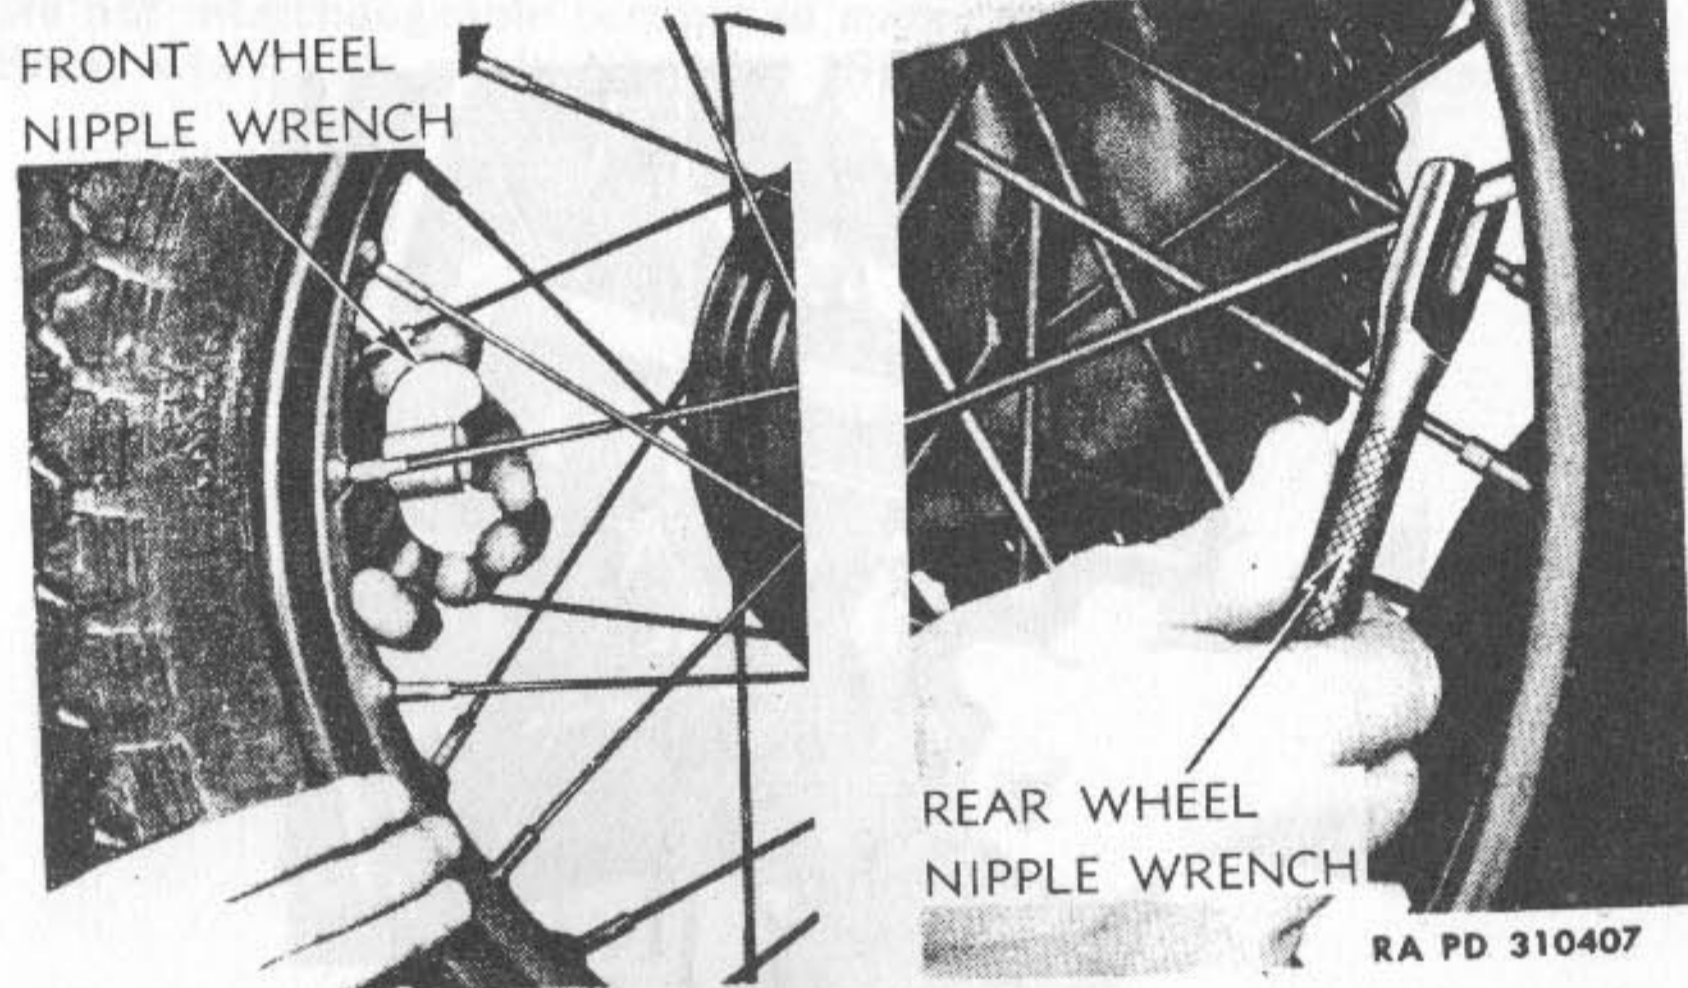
Front and Rear Wheel Spoke Replacement, Using Spoke Nipple Wrenches (41-W-3340) Rear and (41-W-3339) Front
